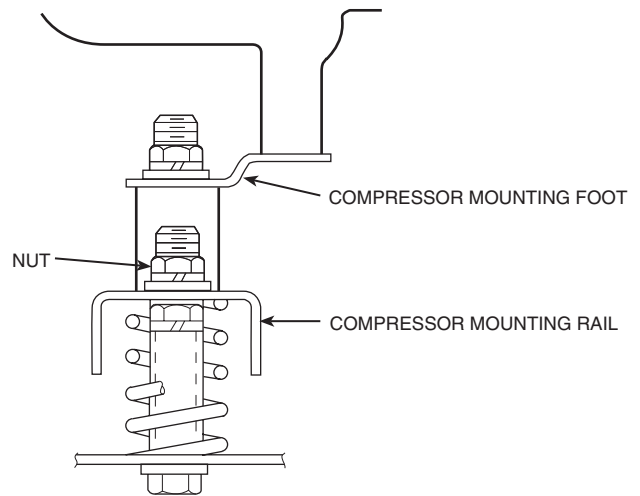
Rear View of Compressor Mounting Rail Assembly — Size 105 Units
